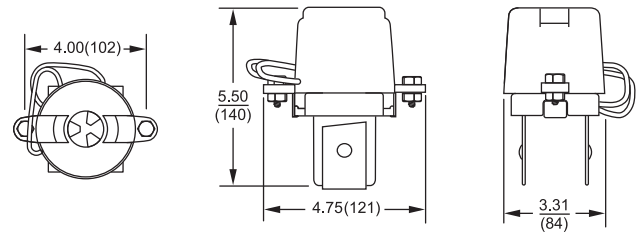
Figure B — Indicator with Attached Sensor. Tie-Wrap Mounting.
